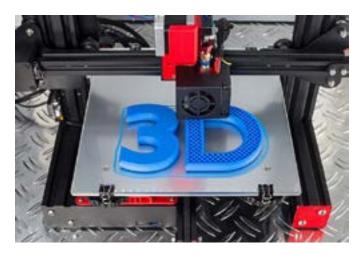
The Art of Combining 3D Printing and CNC Machining
